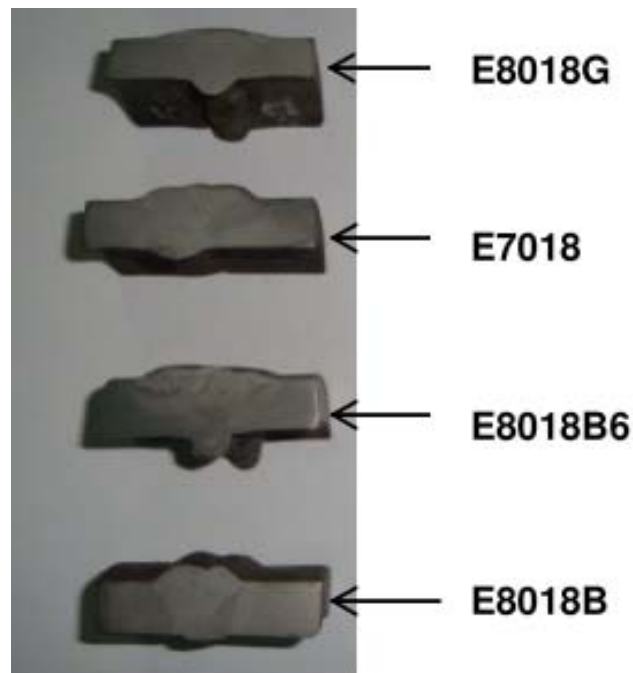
Etched Weld Specimens for Micro Hardness Testing
